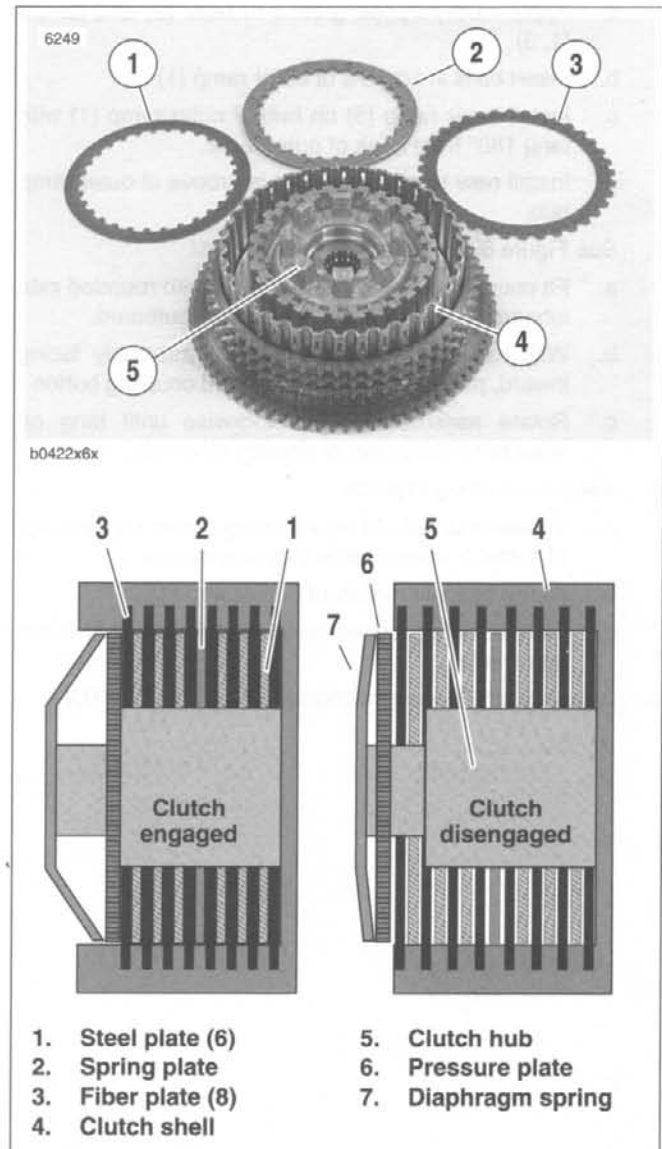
Clutch Plates and Hub/Shell Assembly
